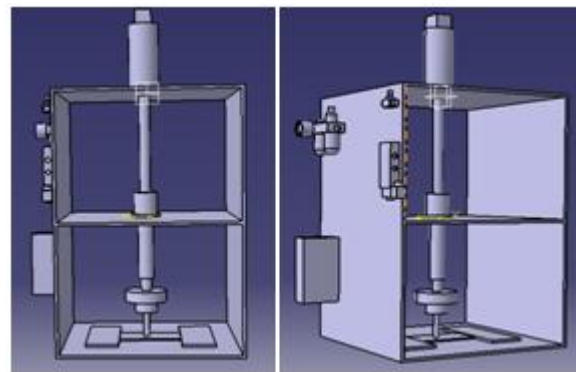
Design Of Vertical Broaching Machine In CATIA SOFTWARE
